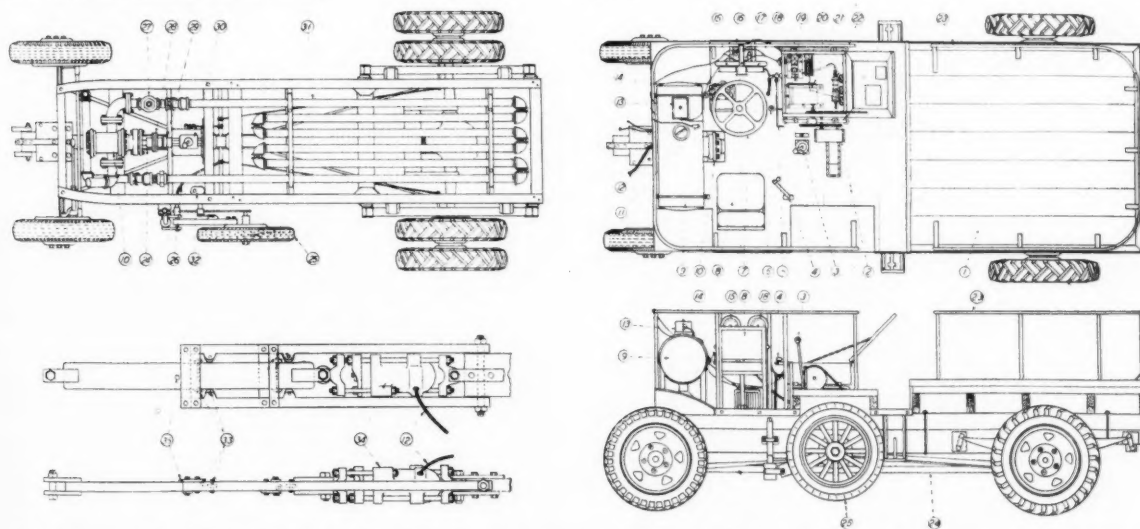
(Upper left) Chassis of the loading machine, showing the loading pump, cooling coil, fifth-wheel arrangement, and other construction features. (Lower left) The telescoping tongue showing the use of guide rollers permitting free transmission of the draft to the dynamometer cylinder which is placed near the loading machine. Fig. 2 (Right) Top and side views of the assembled machine. Parts, as numbered are (1) weight deck, (2) speedometer and chart drive gear box, (3) transmission gear shift lever, (4) fifth-wheel lifting crank, (5) oil pressure cut-off valve to recording unit, (6) signal horn button, (7) loading valve control wheel, (8) operator's seat, (9) oil reservoir, (10) gear pump, (11) switch, start-stop needle, and timer, (12) flexible oil conduit, (13) electric counters for tractor wheel slip, (14) tractor engine speed indicator, (15) loading pump pressure gage, (16) battery, (17) speedometer, (18) direct-reading draft gage, (19) electrically controlled stop-watch, (20) start-stop needle and solenoid, (21) strip chart drive mechanism, (22) pressure indicator mechanism, (23) guard rail, (24) draft coupling to rear axle, (25) fifth wheel, (26) flexible shaft, (27) throttle or loading valve, (28) flexible coupling, (29) outboard bearing front transmission shaft, (30) truck transmission, (31) pipe coil, (32) fifth-wheel lifting mechanism, (33) guide rollers, (34) dynamometer cylinder, and (35) stop pin
